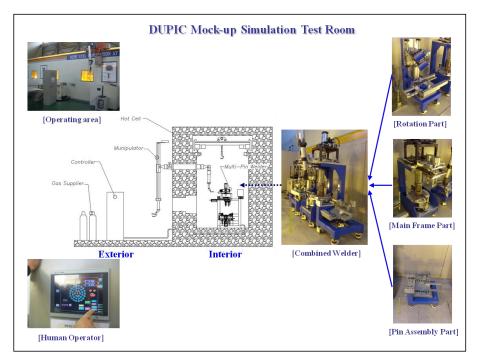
The remote welding equipment and its operation in DUPIC mock-up facility.
